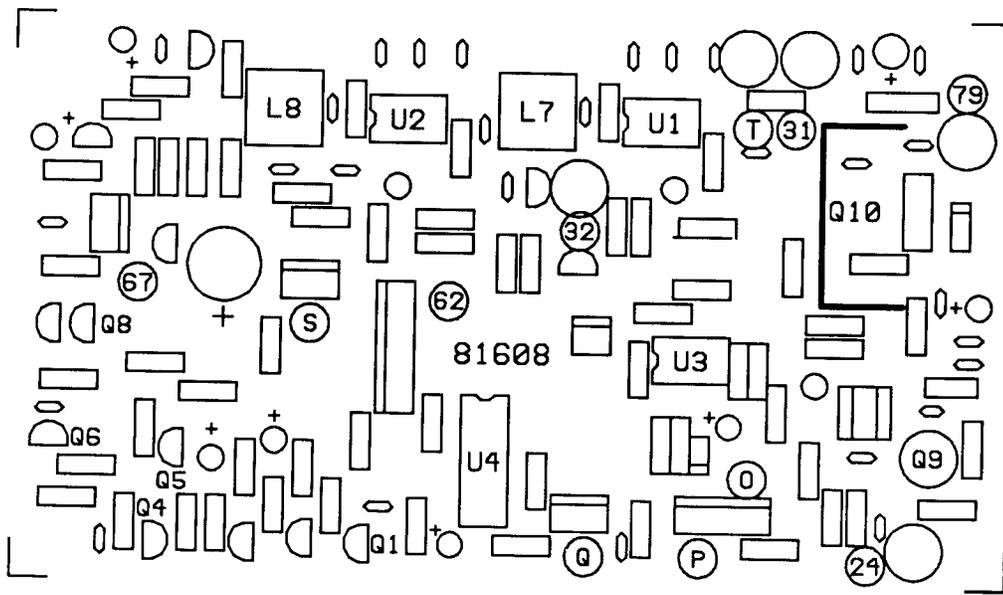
LOW LEVEL DRIVER/N.B. BOARD COMPONENT LAYOUT (81608)
